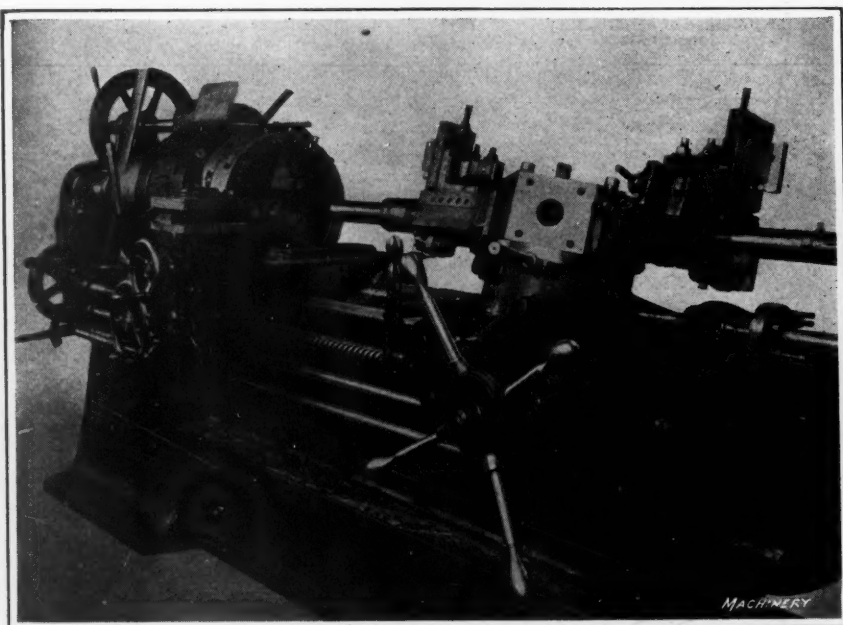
Machine illustrated in Fig. 28 with Work removed to show Method of holding
